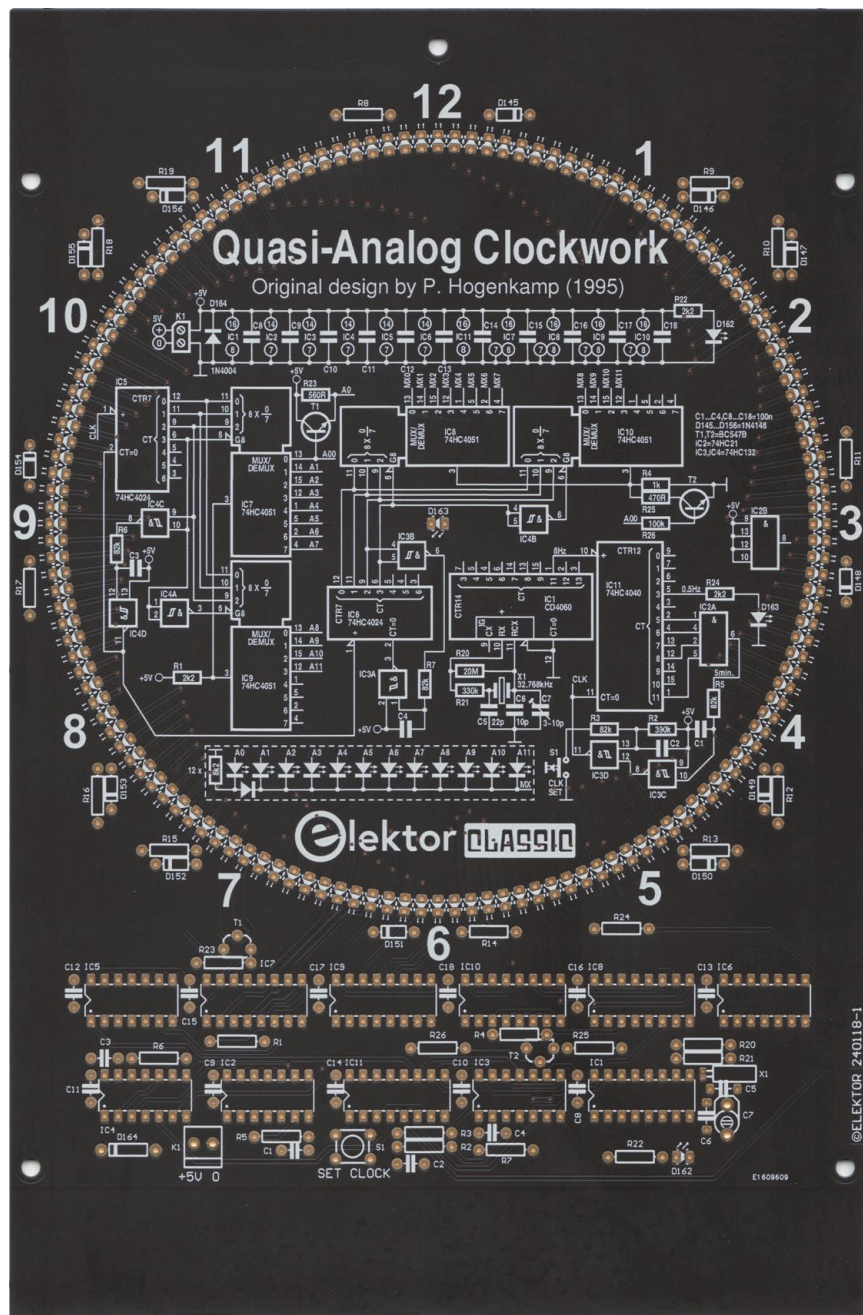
Top view of supplied PCB 240118-1 v1.1.
